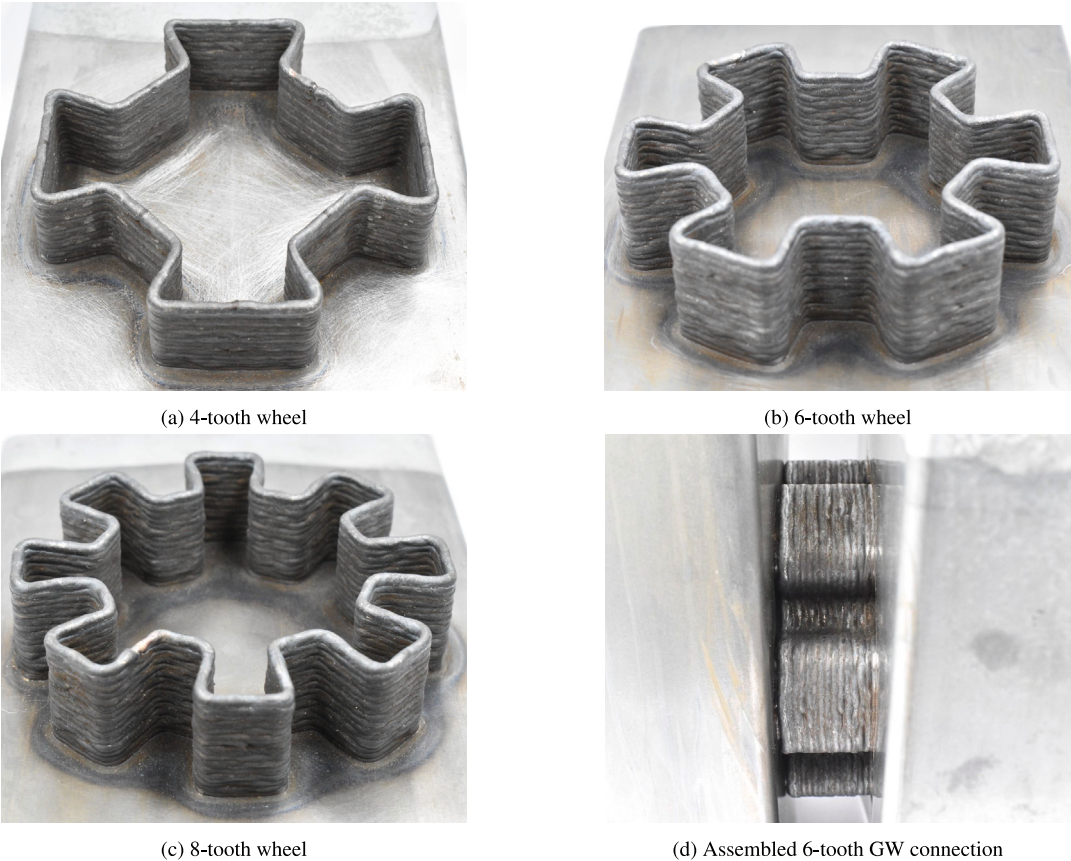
4-, 6-, and 8-tooth wheels and assembled 6-tooth GW connection printed using the WAAM process.
